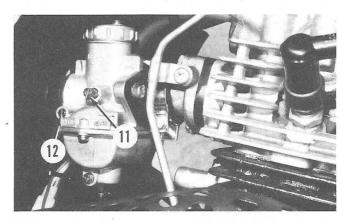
View showing location of idle mixture screw (12) and idle speed screw (11).
